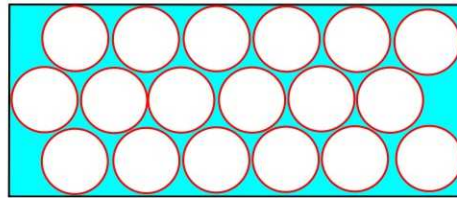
The parted strip and cut out elements arrangement for linear cutting view
